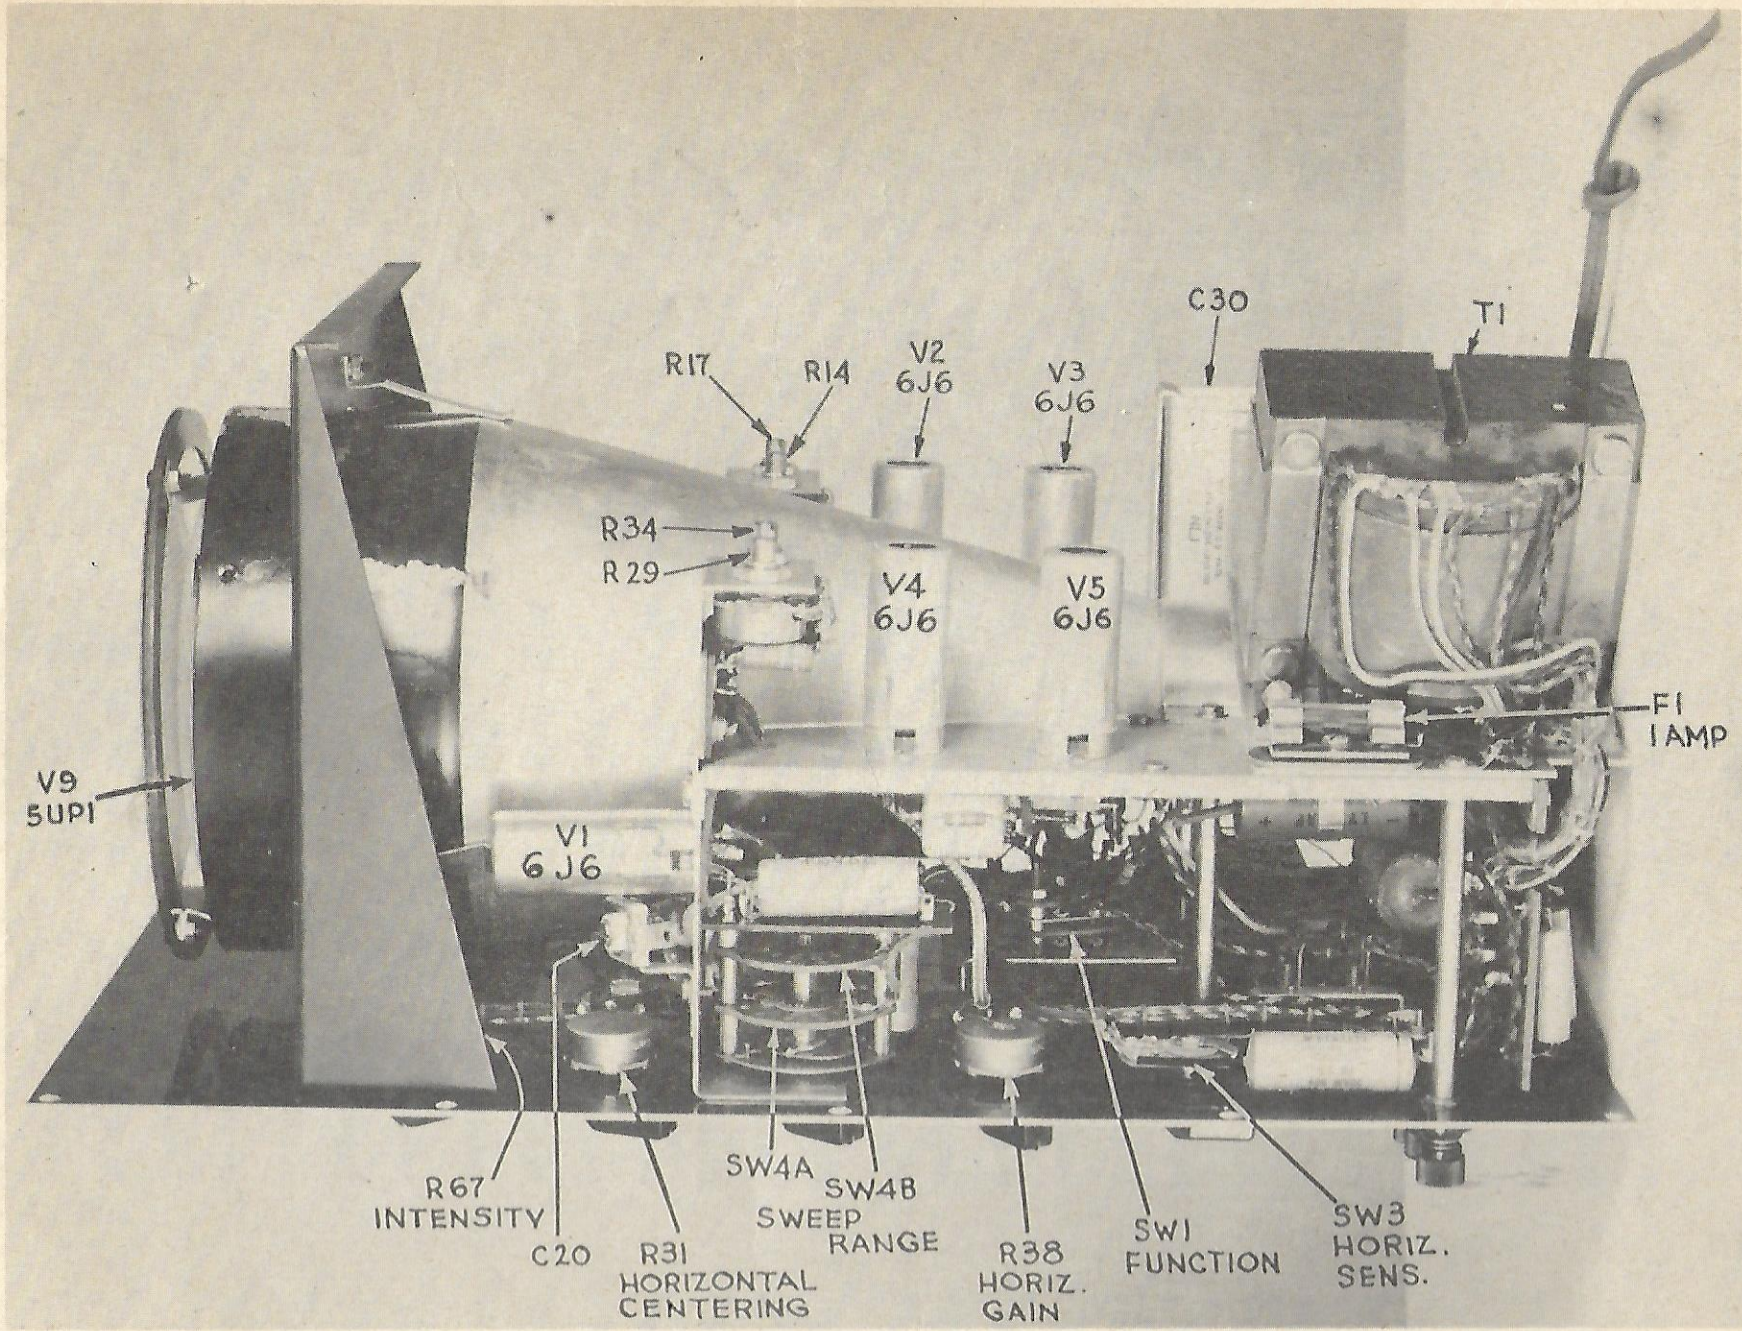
RIGHT OBLIQUE VIEW OF MIRROSCOPE CHASSIS REMOVED FROM CABINET.
